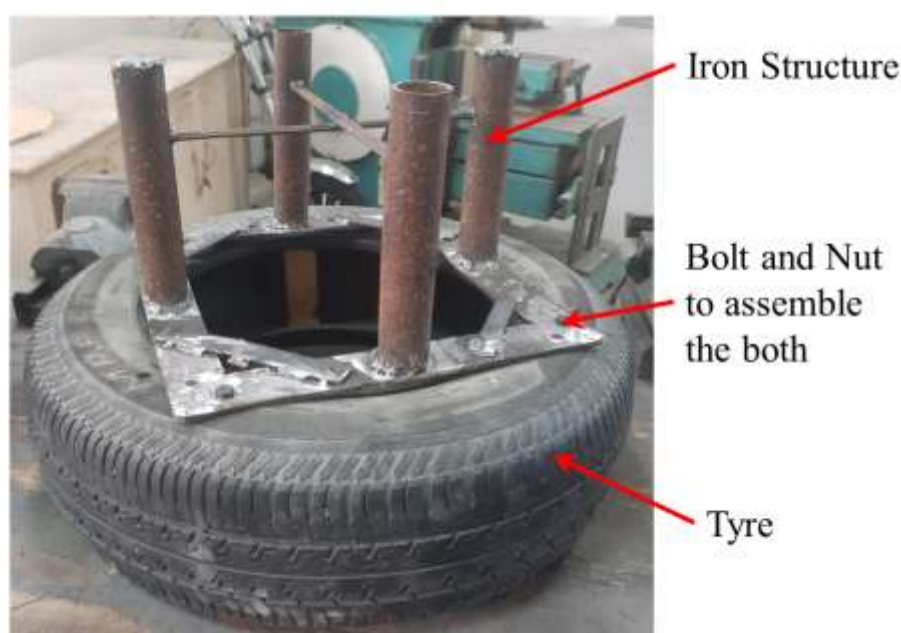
Assembly of Iron Structure and Tyre with the help of Bolt and Nut
